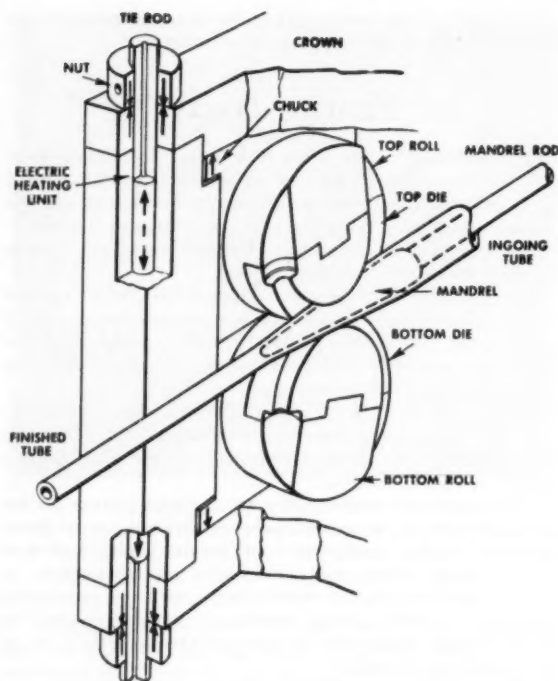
METHOD OF PRELOADING SADDLE FRAME, ROLLS, AND ROLL NECK BEARINGS
